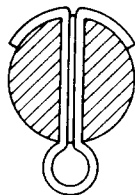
Method of Clinching Cotter Pin to Clear Wiring
